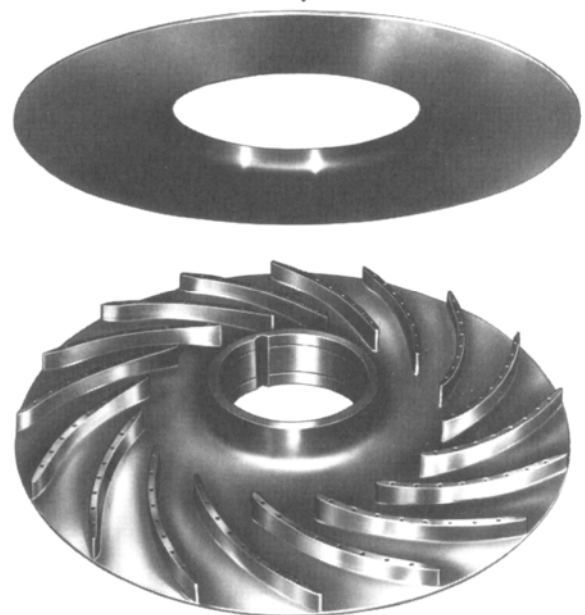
A. Impeller with milled vanes on solid disc forging. (Used by permission: Dresser-Rand Company.)
